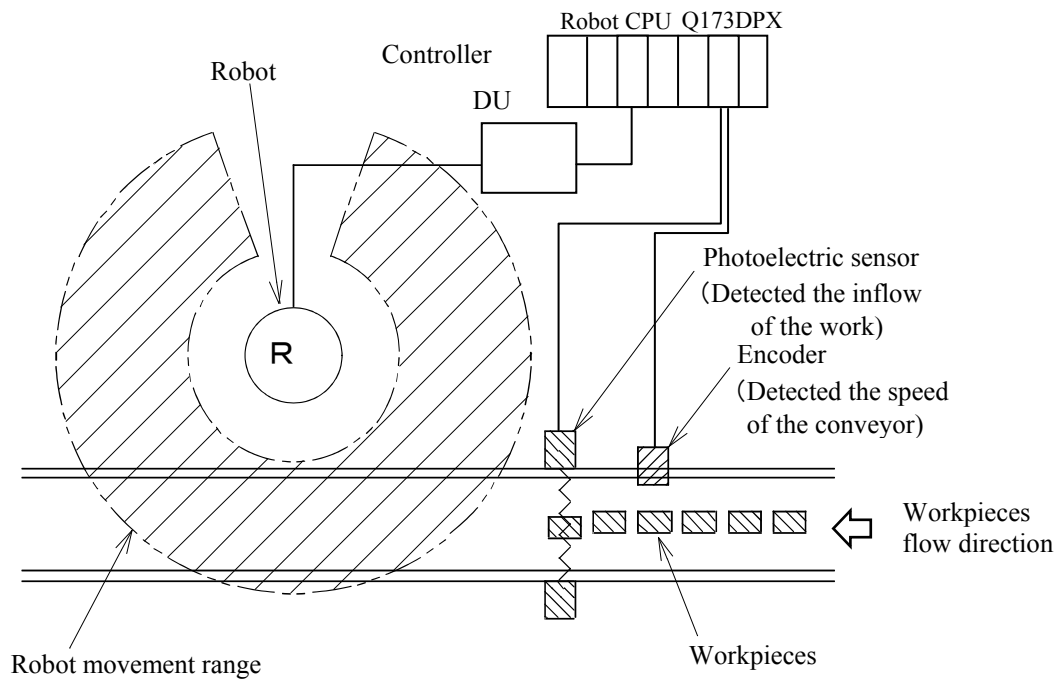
Configuration Example of Conveyer Tracking (Top View)
